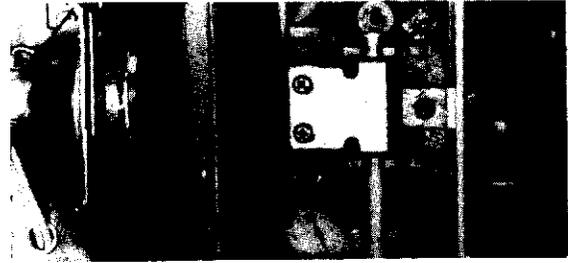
LENSHOLDER STOP PIN ADJUSTMENT.
